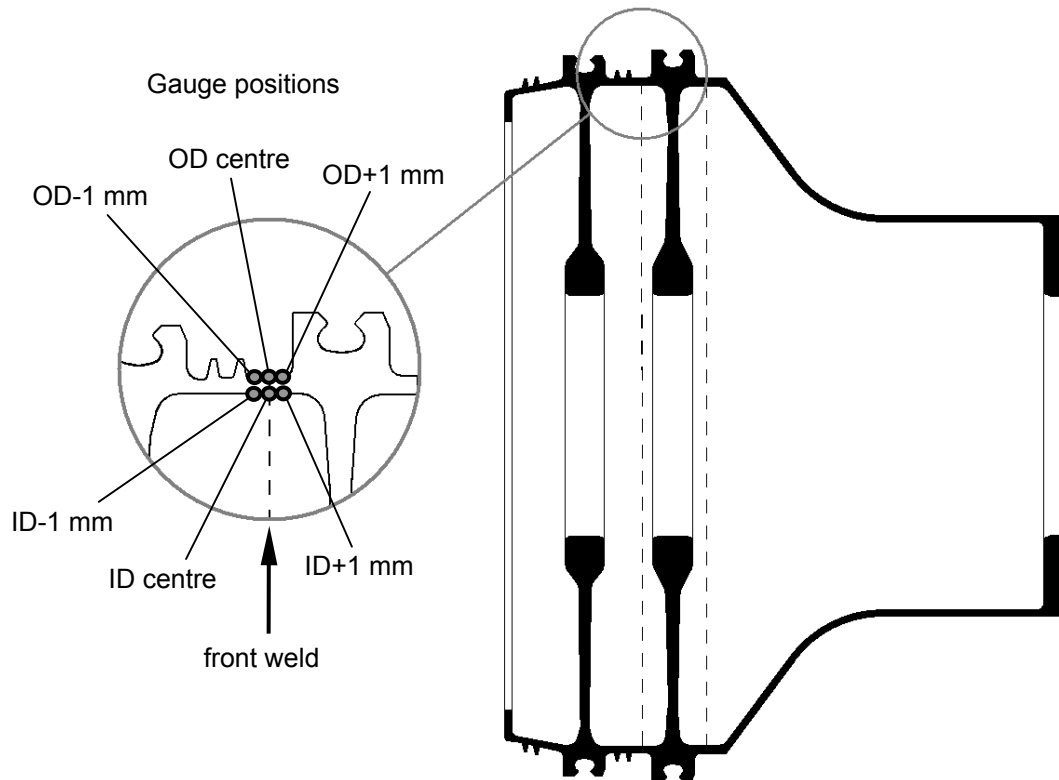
Schematic view of HP compressor drum assembly and gauge positions
